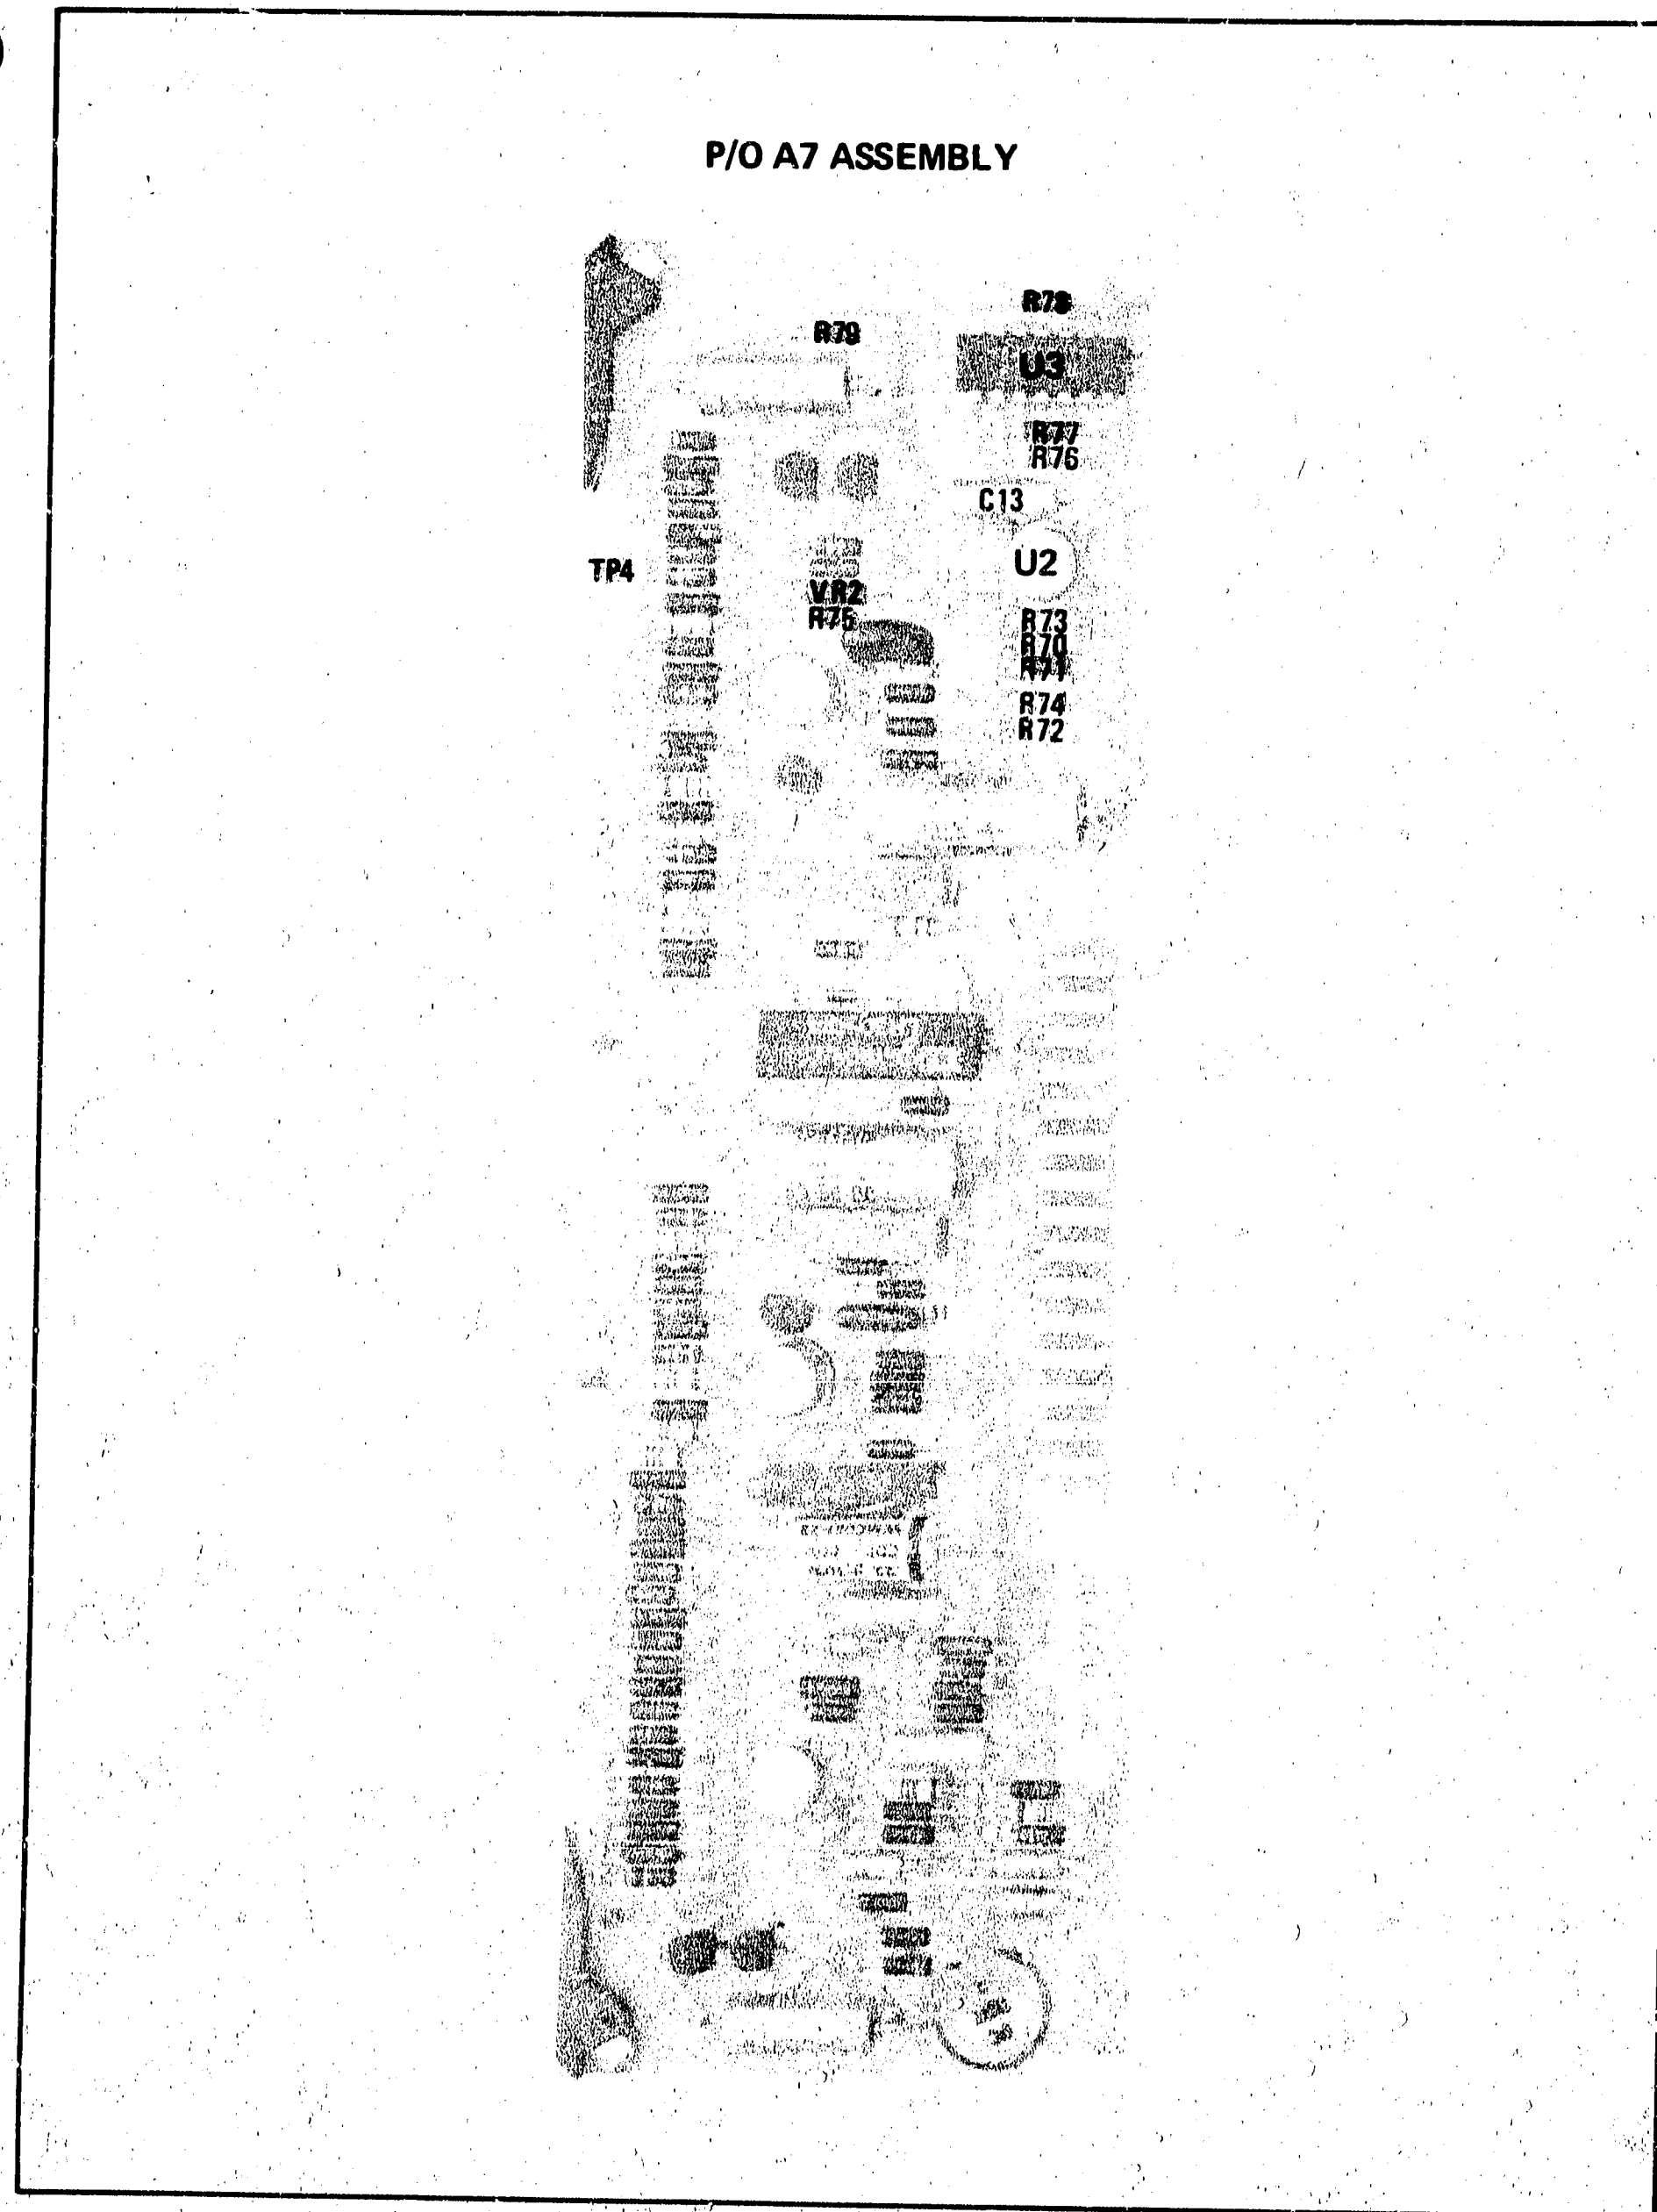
P/O A7 FM Shaping Assembly Component Locations
